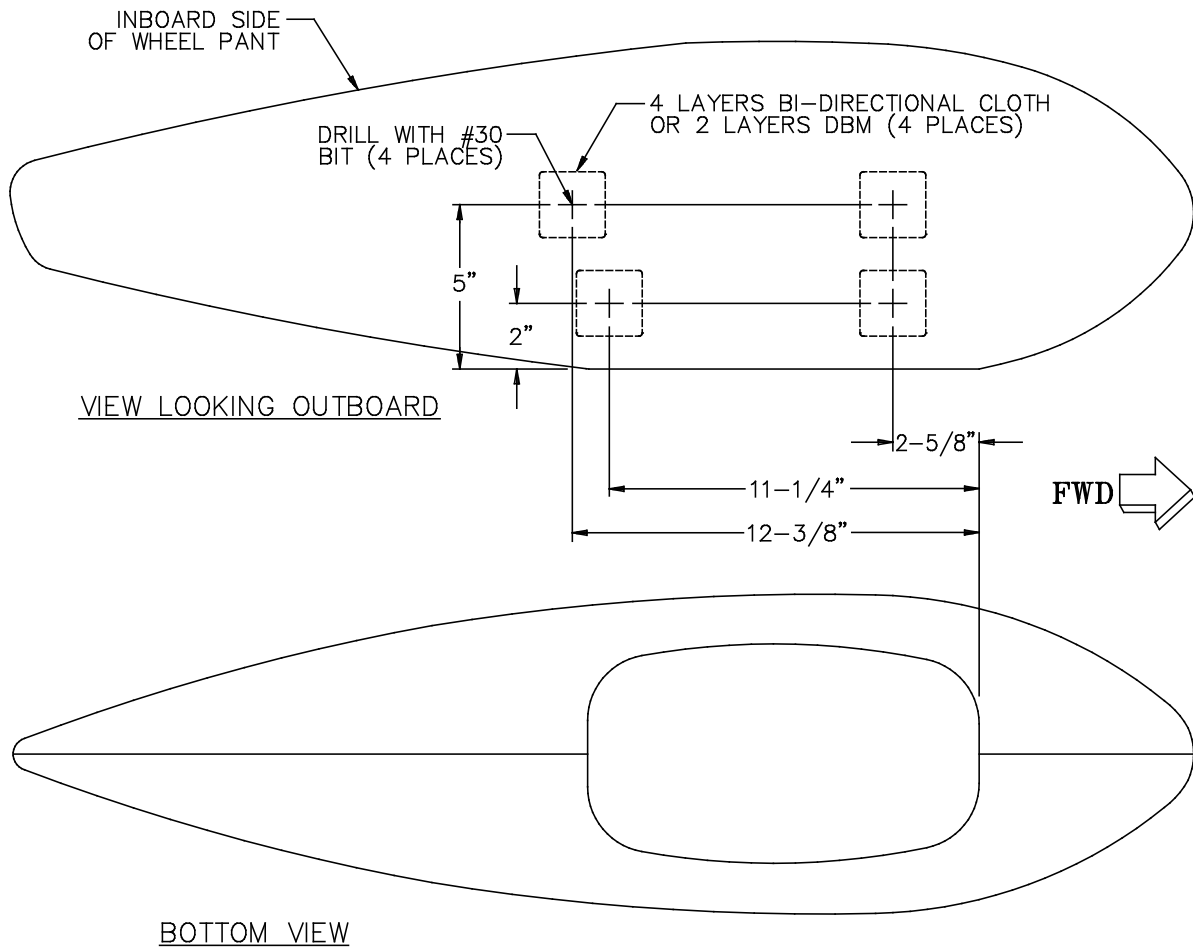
Drilling the Inboard Wheel Pant Mounting Screw Holes (Revised Backing Plate Design)
